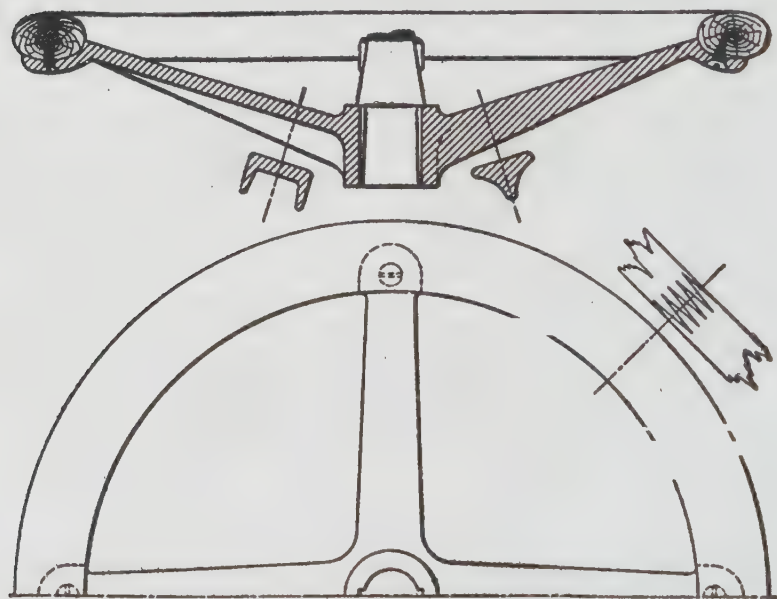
STEERING WHEEL WITH ALUMINUM SPIDER AND BENT WOOD RIM.
